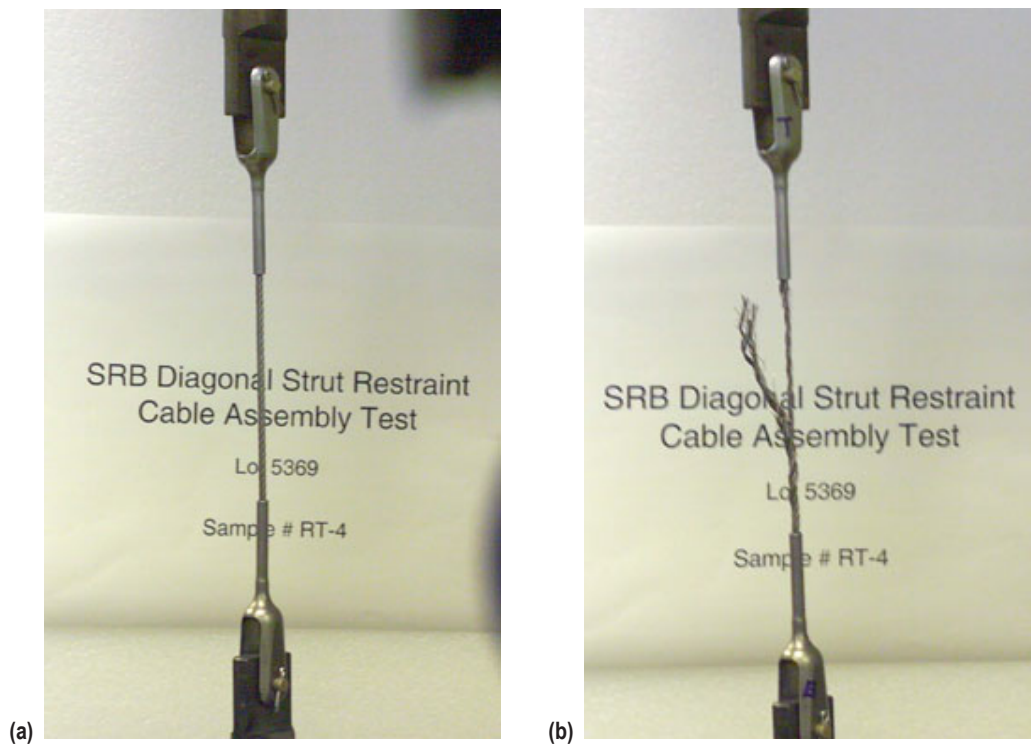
5369–RT–4 (a) before testing and (b) after testing.
